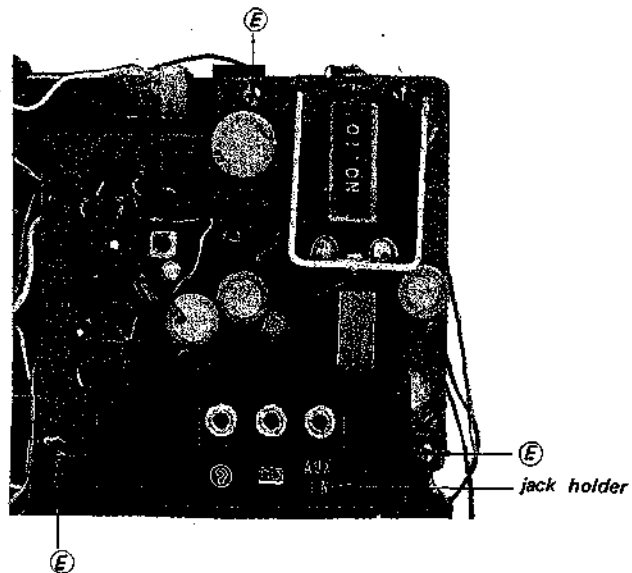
IF-AF circuit board removal, steps 2 and 3
